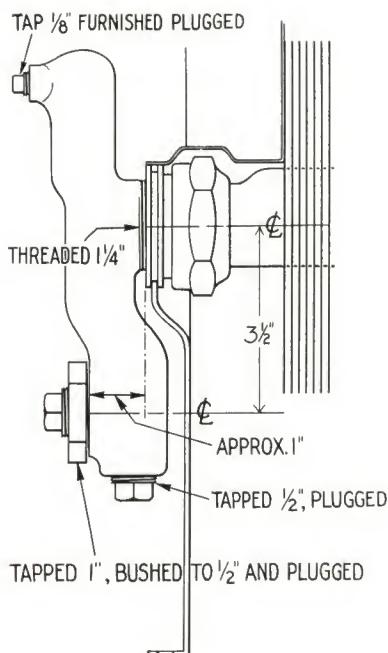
Dimensional Detail of Cast Bronze Outlet Fitting.
